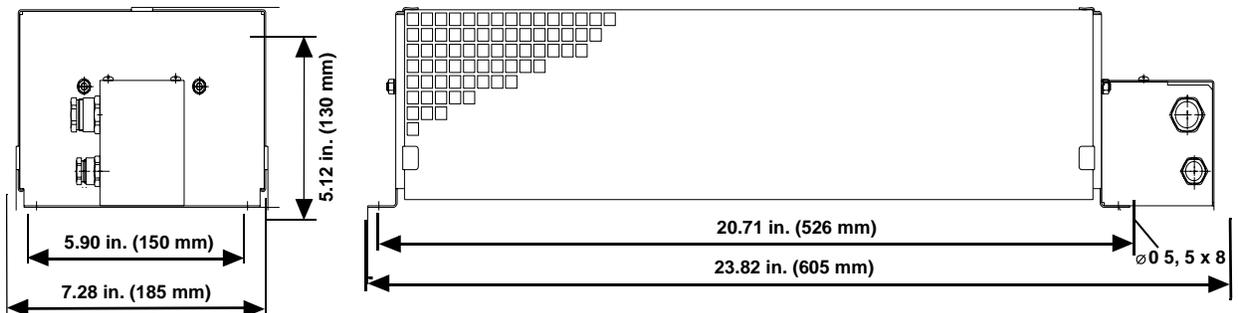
Mounting Dimensions for 460V External Shunt (P/N M.1302.7061)
